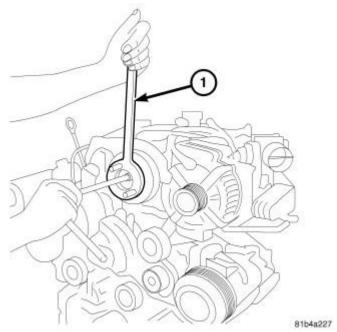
Adjusting Timing Belt Tensioner Using Indicator & Gauge Courtesy of CHRYSLER LLC
